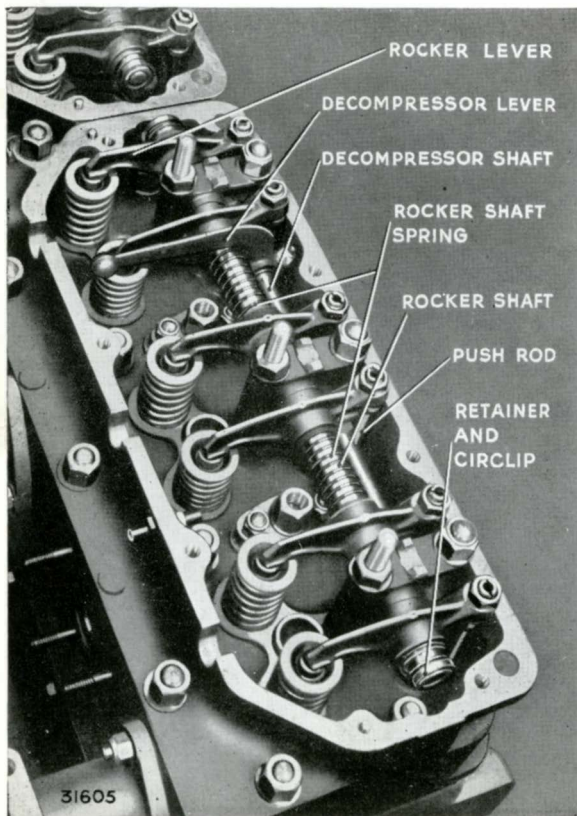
THE ROCKER SHAFT ASSEMBLY
